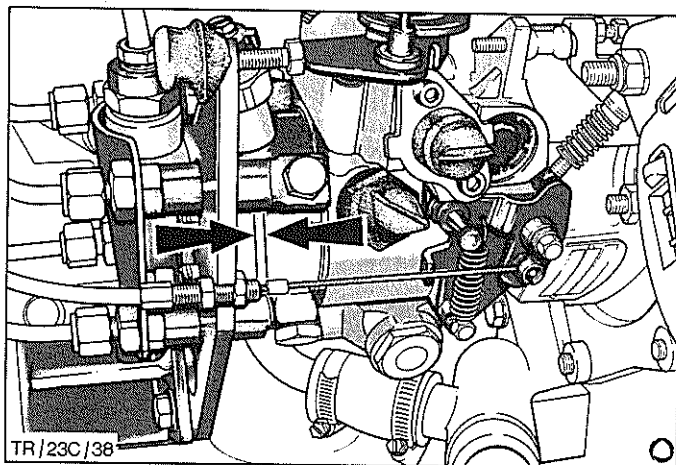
Adjust cable until a 2 to 3 mm gap between the ferrule and end of adjuster (CAV).
